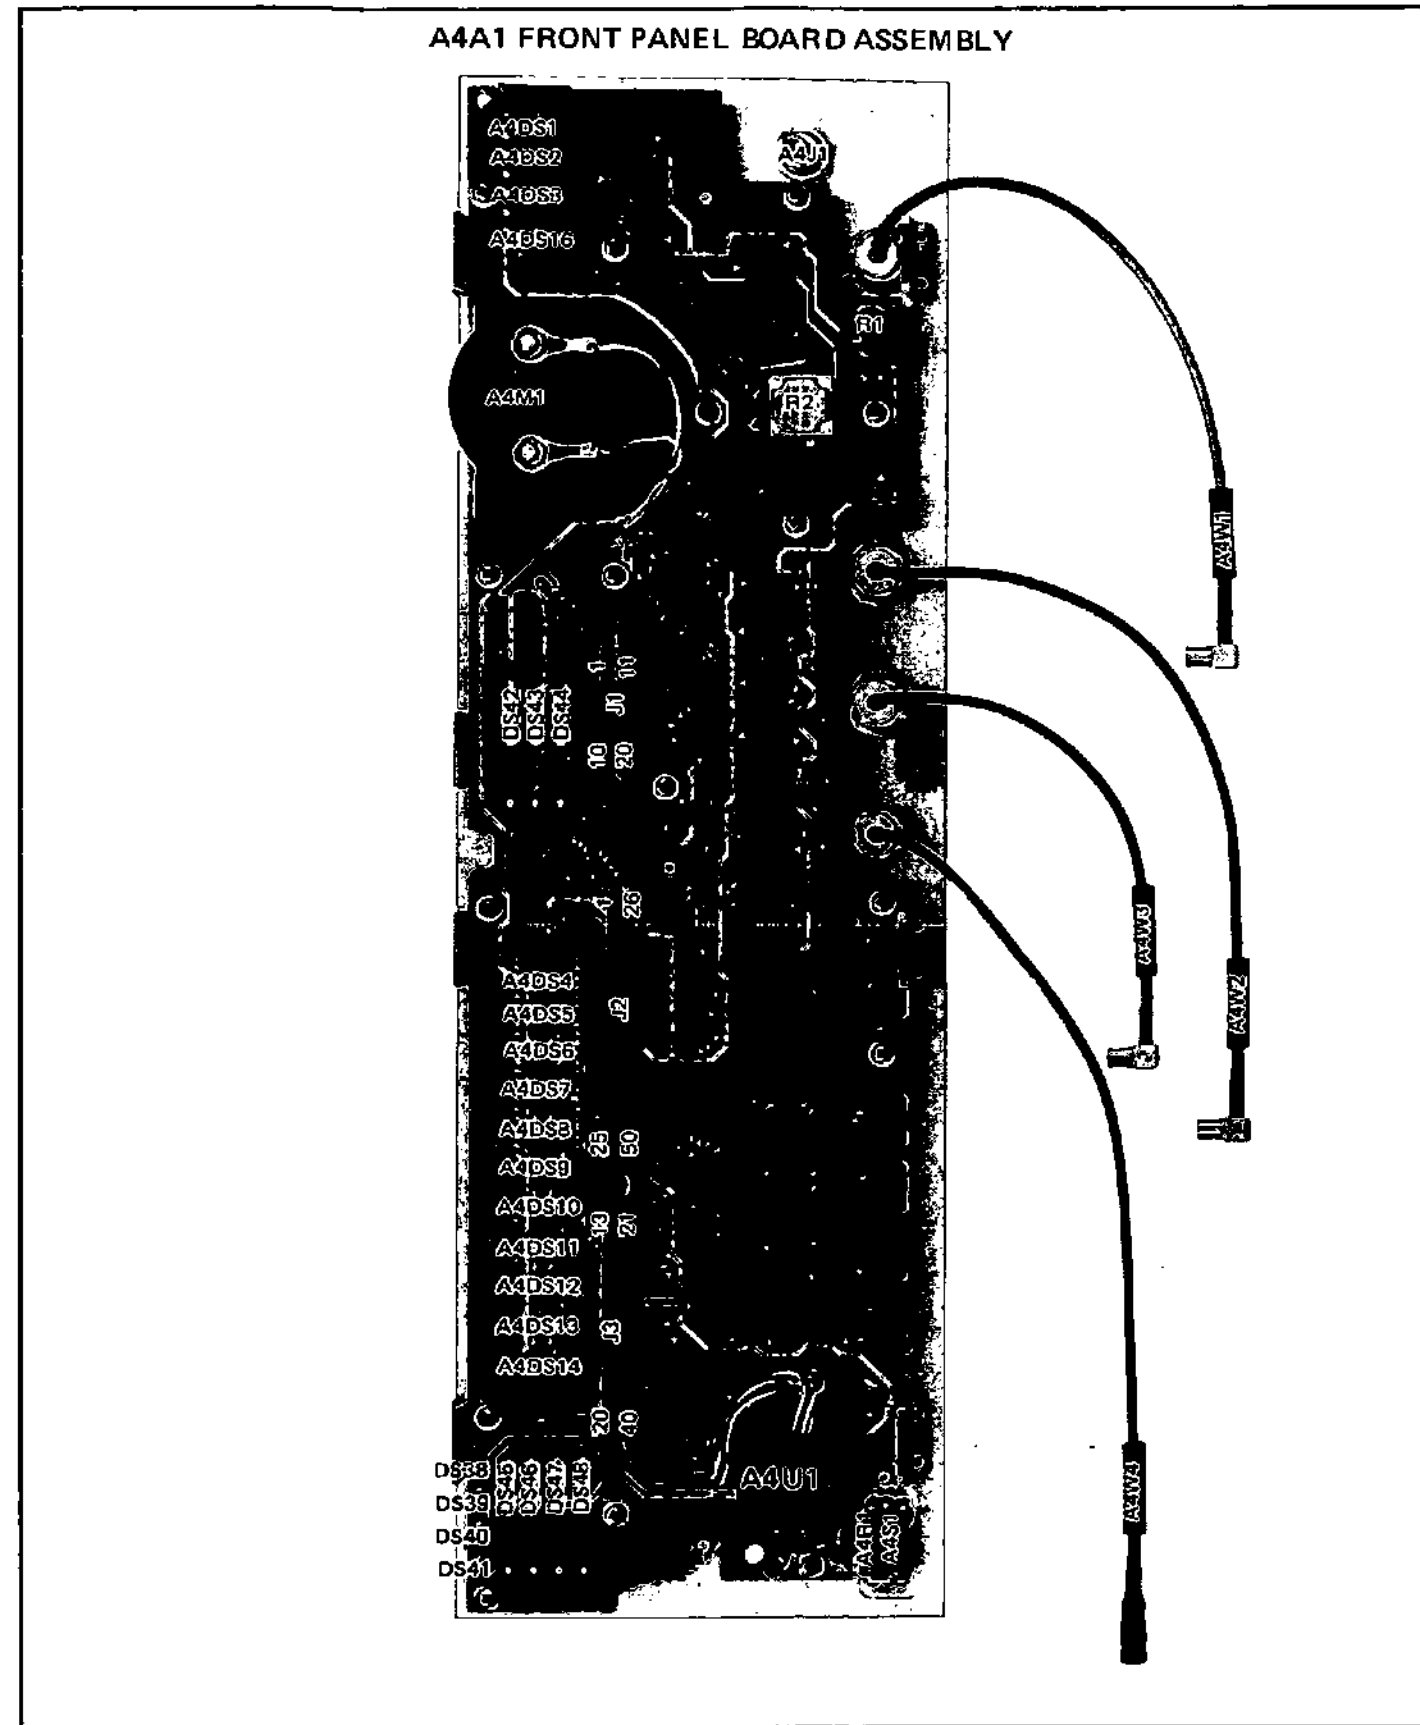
P/O A4A1 Front Panel Assembly Component and Test Point Locations
